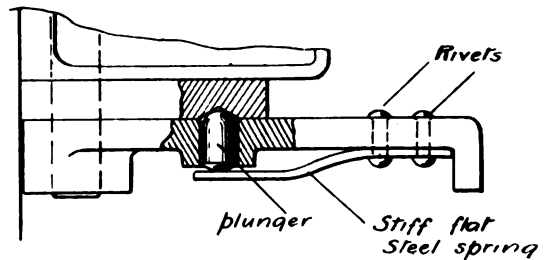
FLAT SPRING CATCH FOR FIREDOOR HANDLE.
